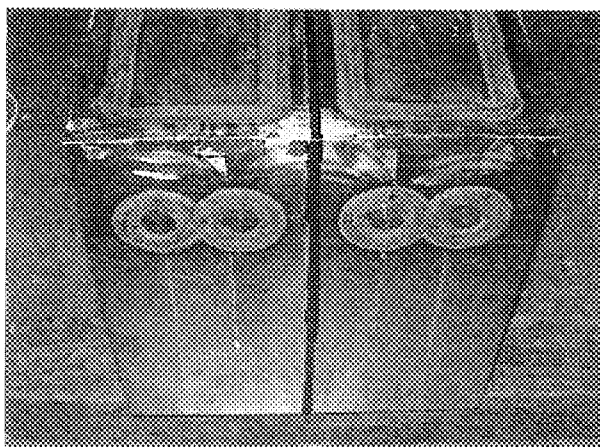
Welded plugs of poloidal header which interconnect different groups of cooling channels
